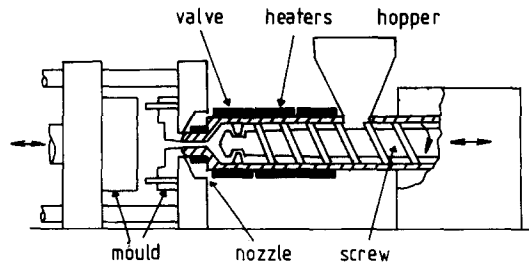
(b). Reciprocating screw-type injection moulding machine.
